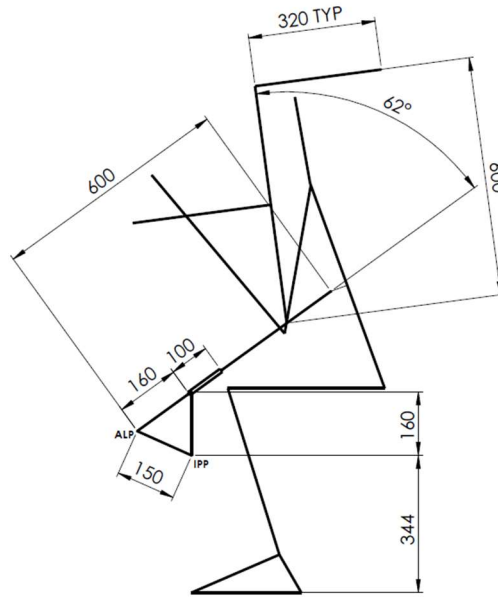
Geometry and Dimensions of Sliding Pivot Mechanism
